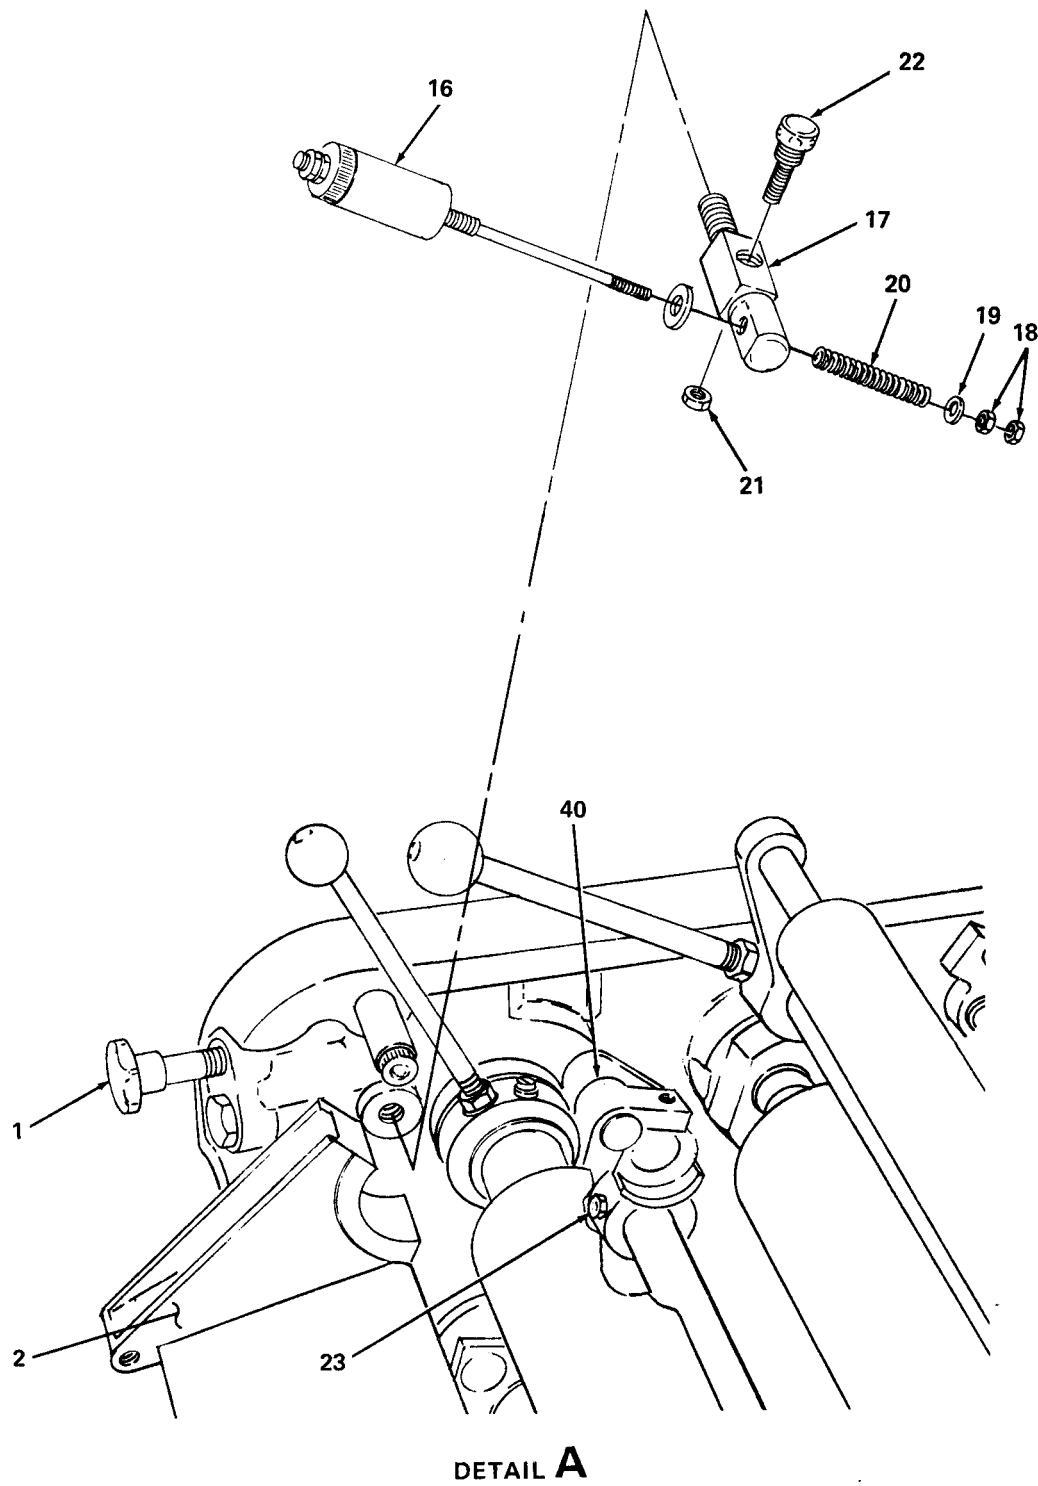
Ink Fountain Roller Removal (Sheet 2 of 3).
